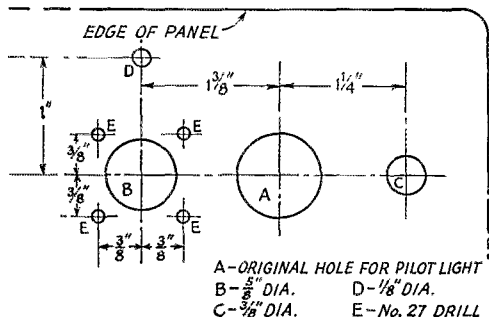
Dimensional layout for mounting the fuse holder, r.f. input and r.f. output connectors. The fuse holder mounts in the hole originally used for the pilot light. This view is from the rear of the panel.
